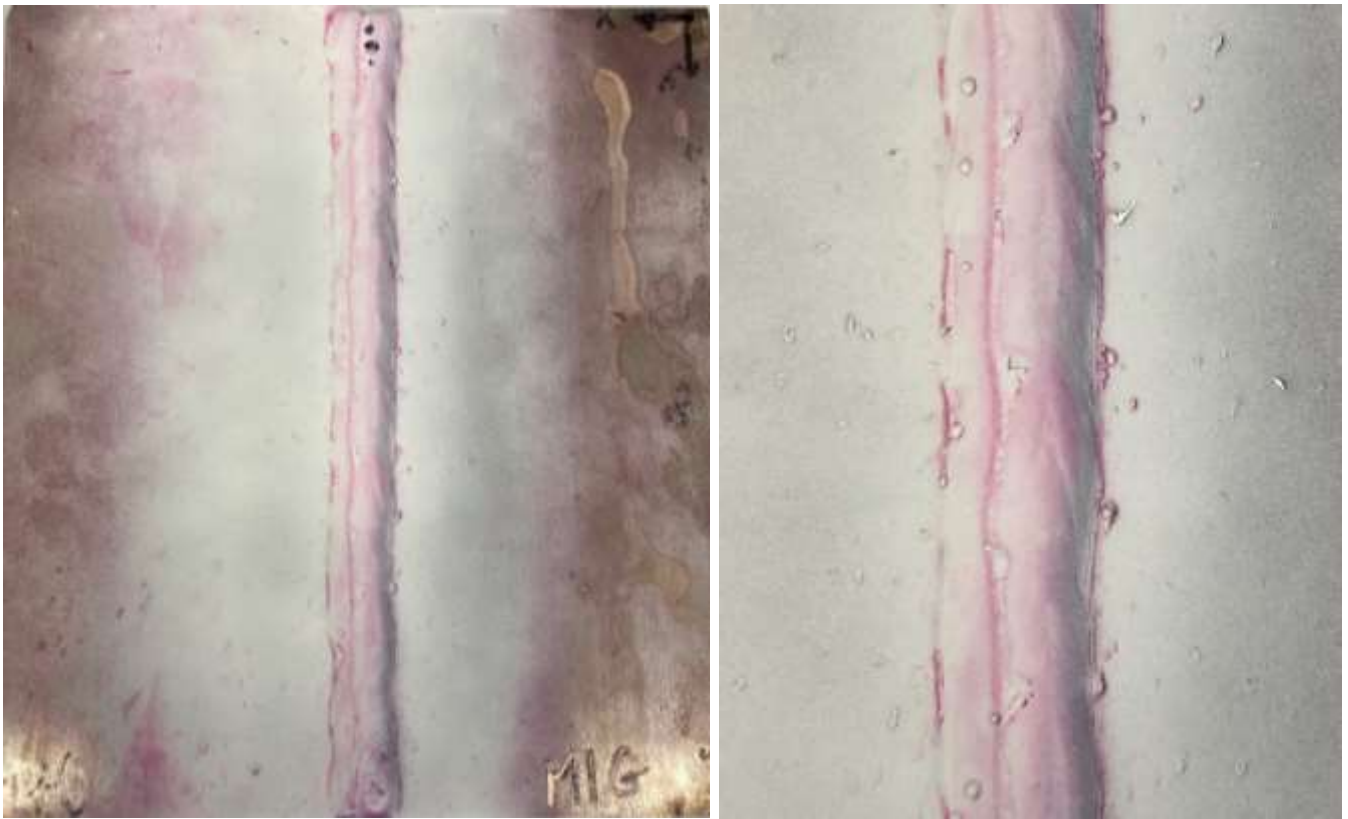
Results of penetrating liquids analysis on MIG weld bead
